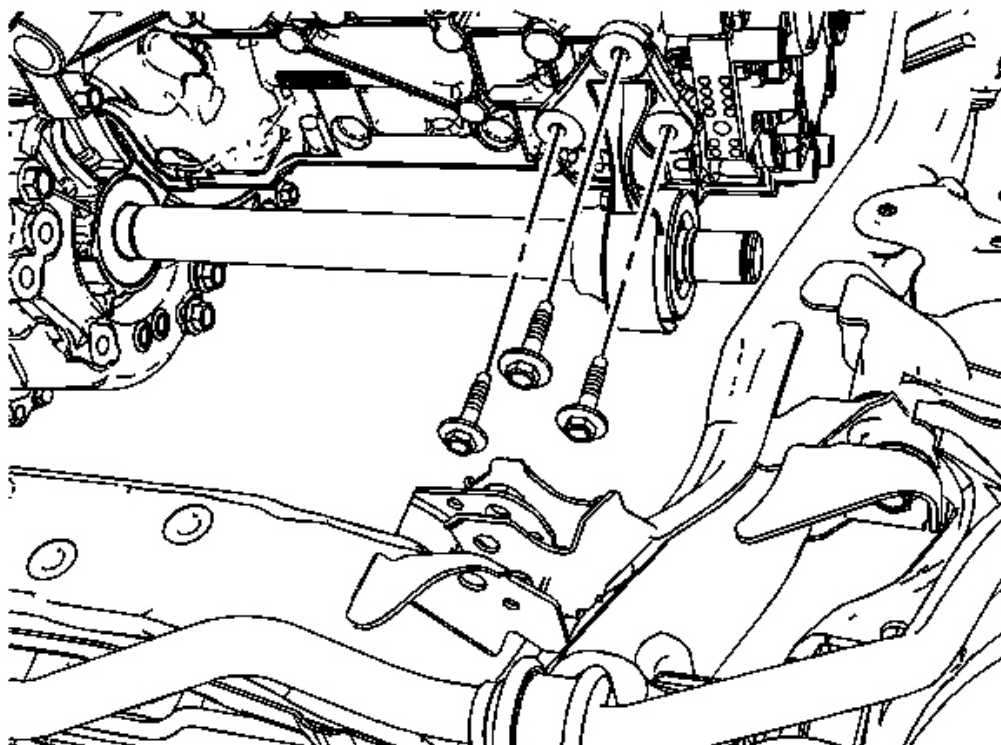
Identifying Intermediate Shaft Support Bracket Mounting Bolts
